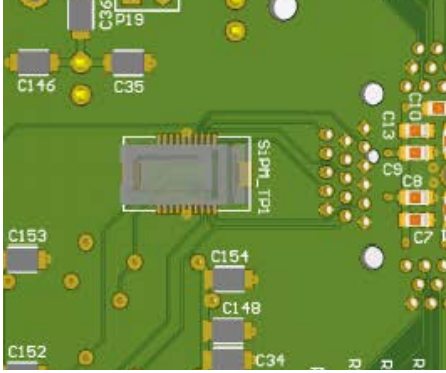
Multipurpose SiPM connector at the bottom side of the board.
